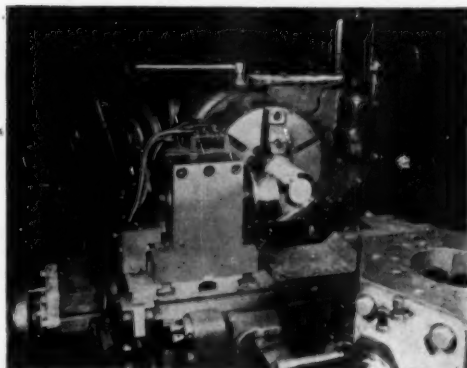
TOOL POST WITH TOOLHOLDER, MOUNTED ON TURRET LATHE
